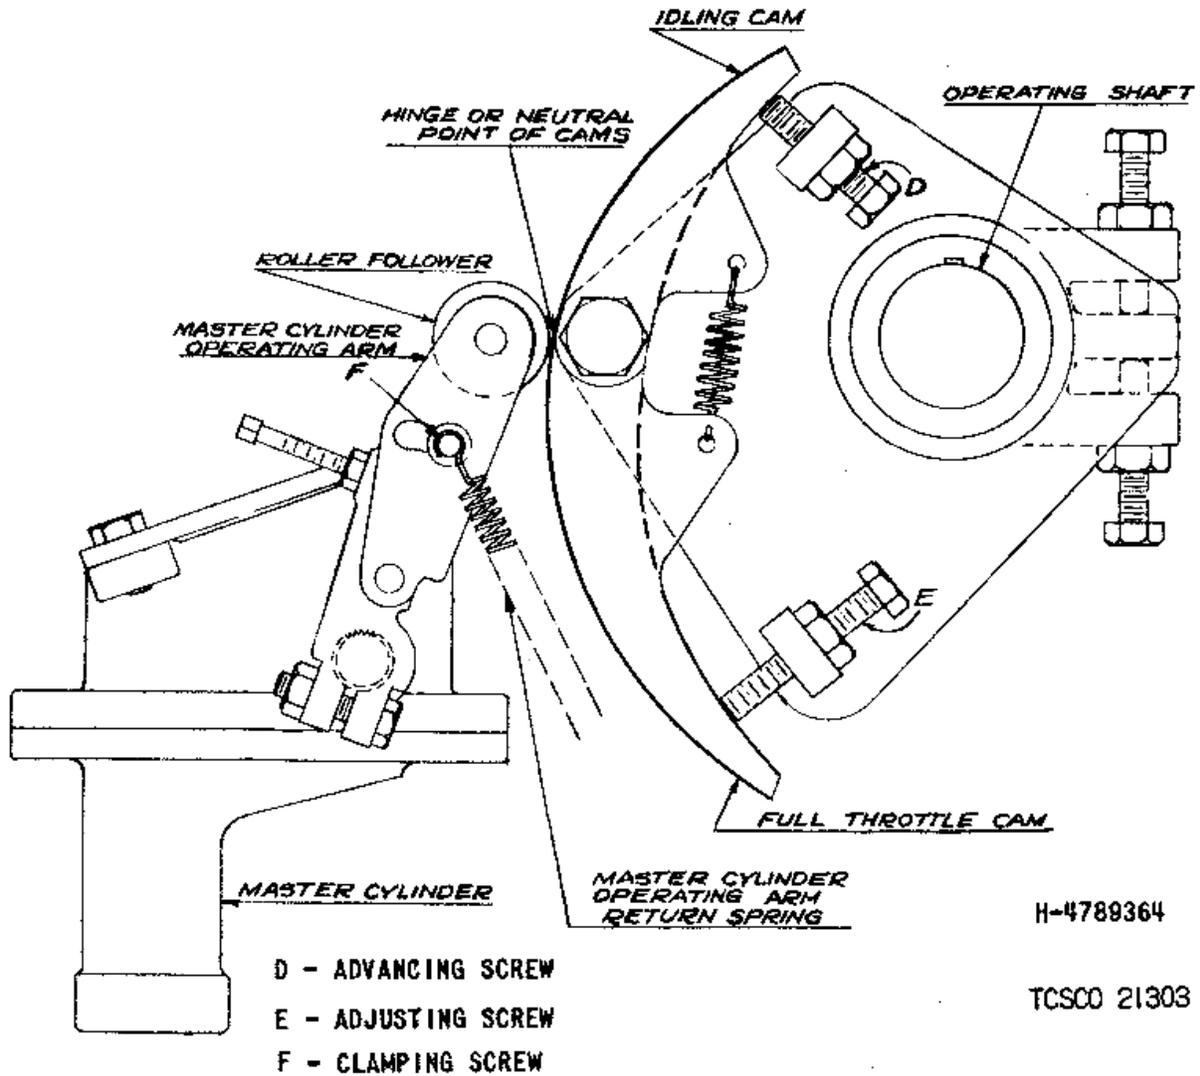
Master cylinder and cam arrangement used in hydraulic throttle control.
